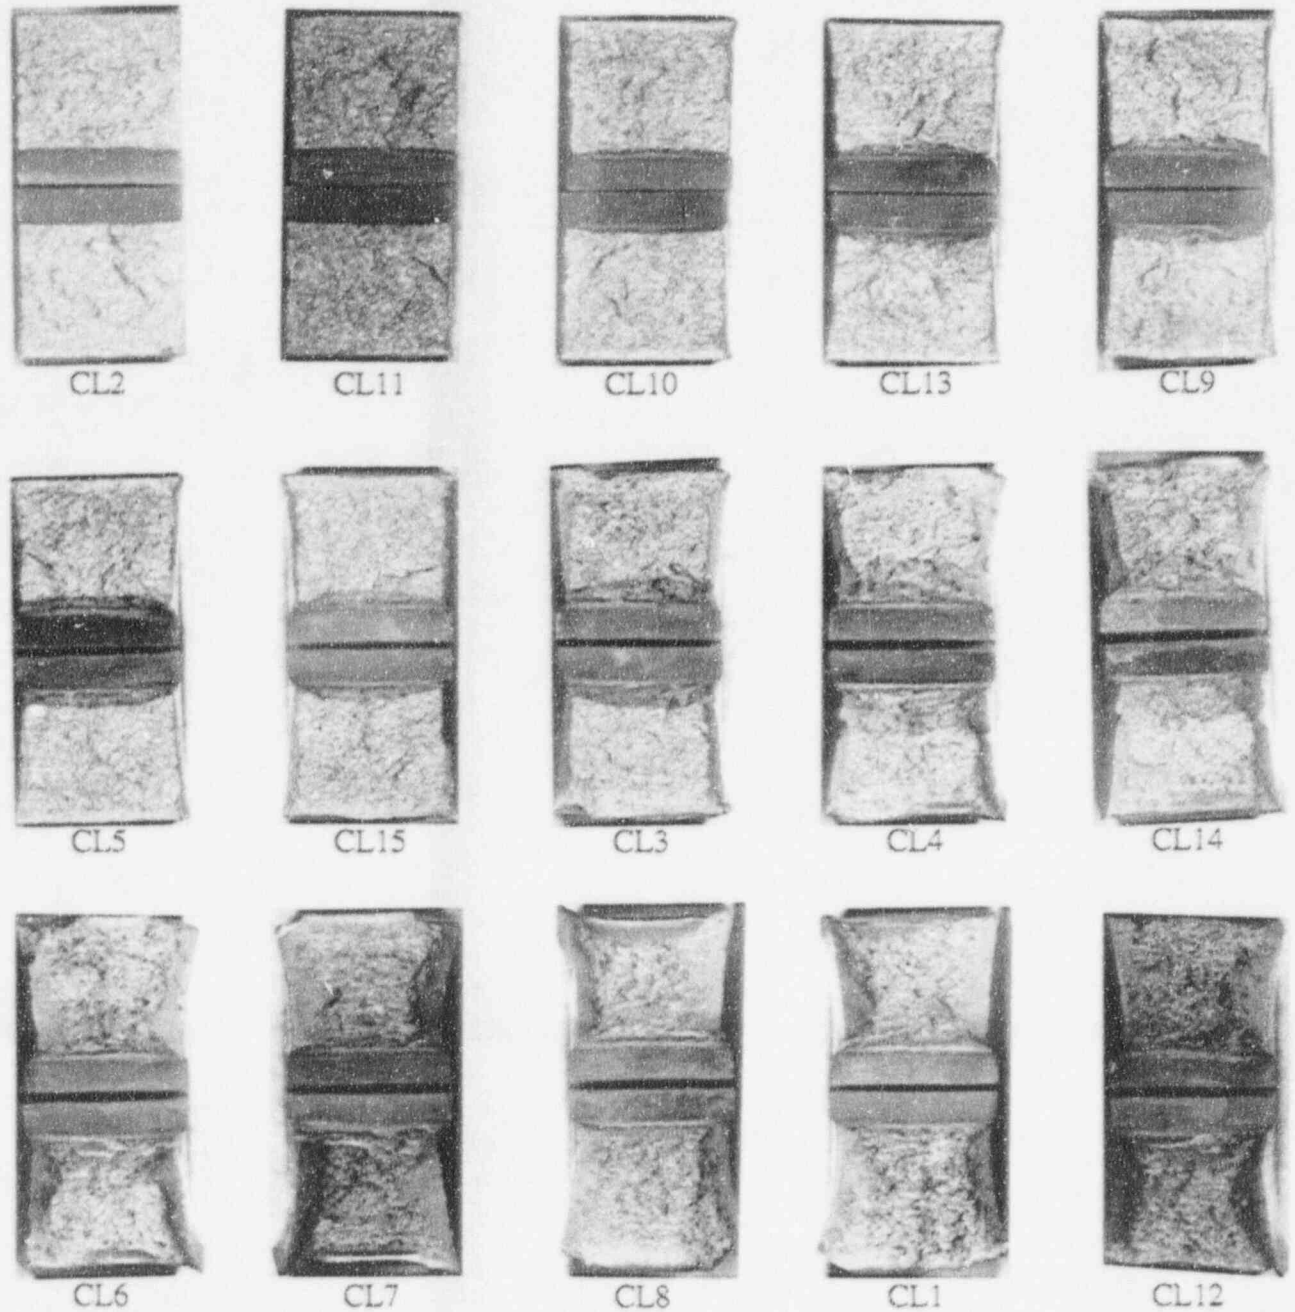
Charpy Impact Specimen Fracture Surfaces of the CPSES Unit No. 2 Reactor Vessel Intermediate Shell Plate R3807-2 (Longitudinal Orientation)
